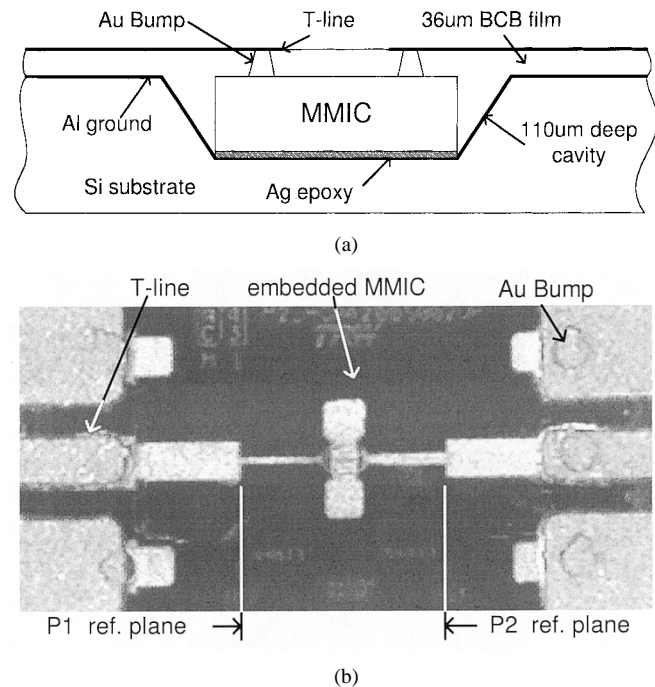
(a) Cross section and (b) top view of the packaging scheme.
